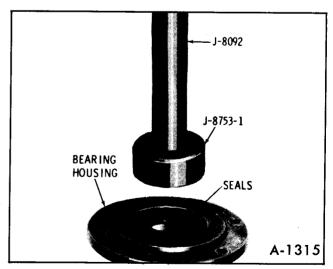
Removing Oil Seals From Pinion Bearing Housing
